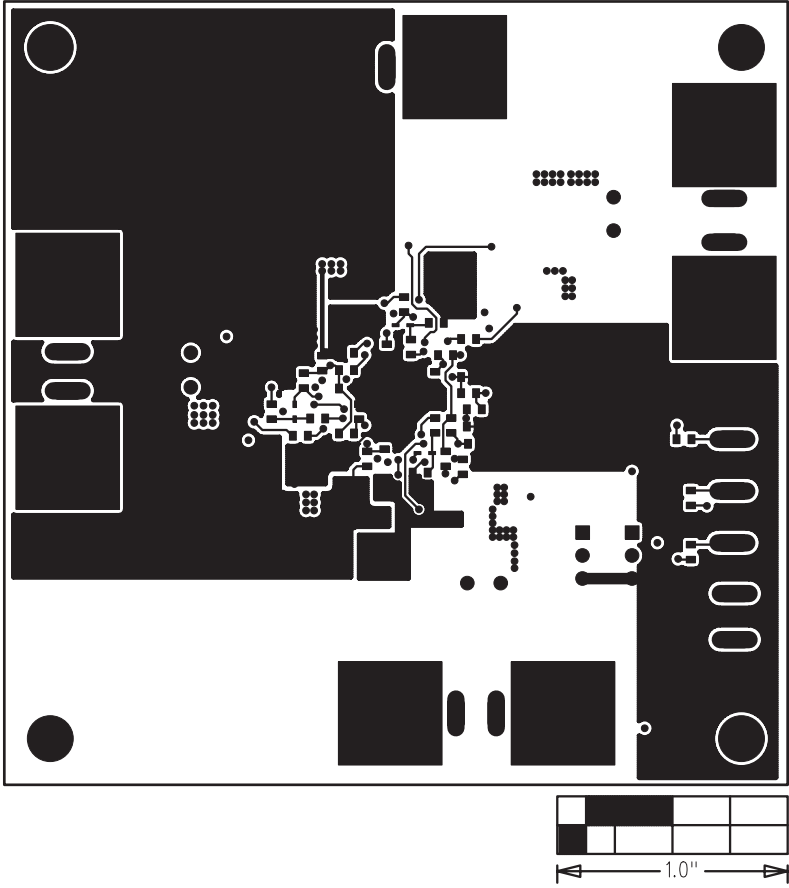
MAX15003 EV Kit PCB Layout—Solder Side
